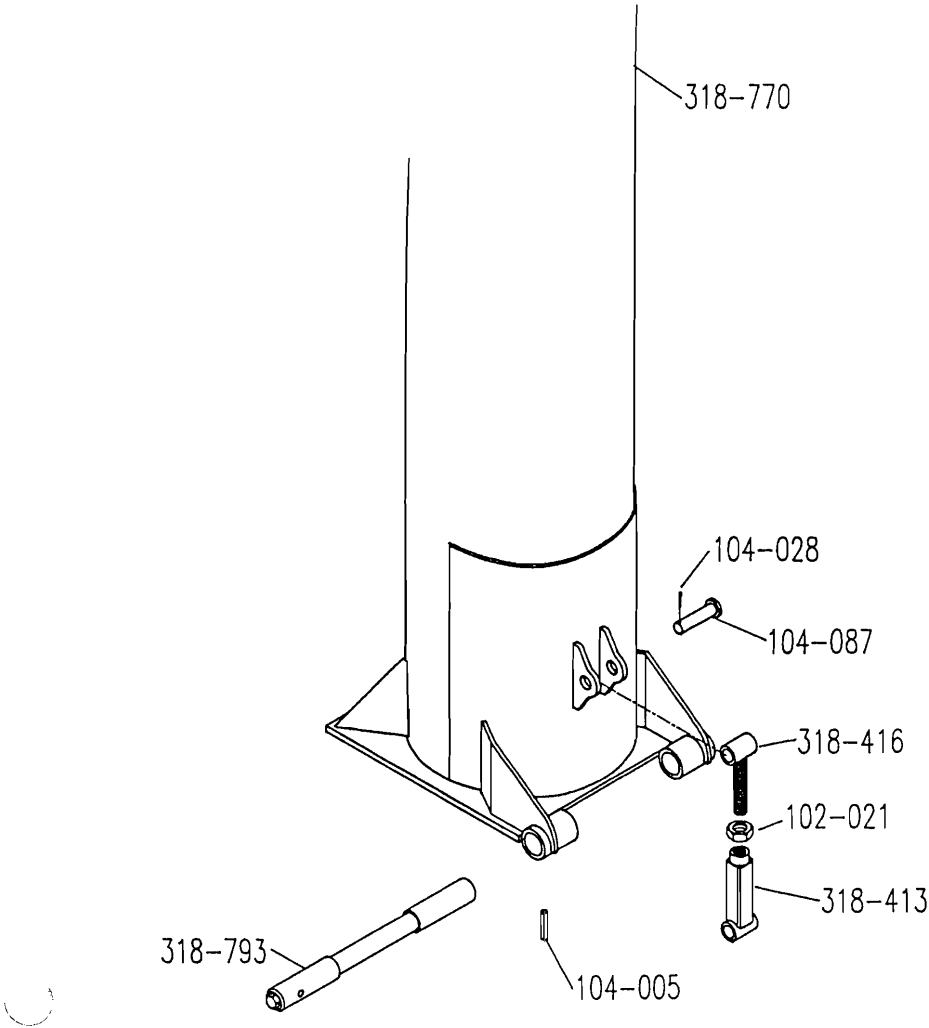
TOP AUGER HINGE ASSEMBLY
